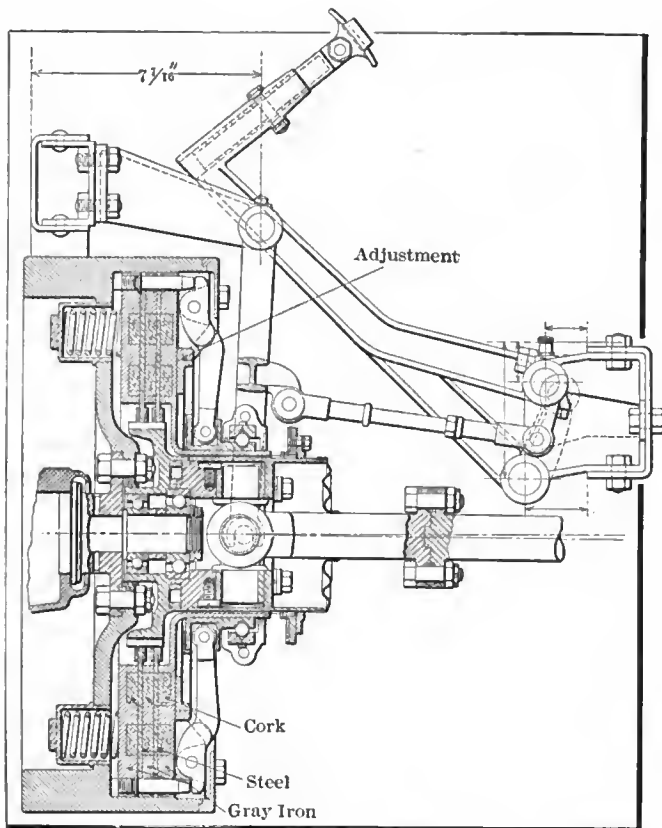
A five-plate clutch of steel and iron, with cork inserts in the iron plates
